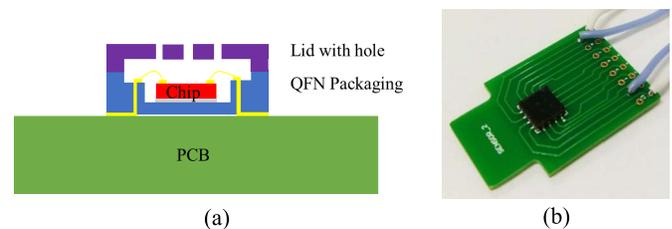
(a) the schematic diagram of a gas sensor package; (b) the photograph of a packaged sensor on test PCB.
